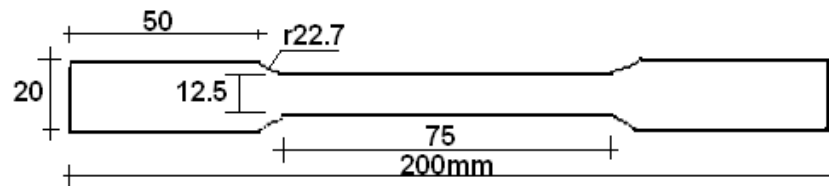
Geometry and dimensions of the test specimens. Dimensions in mm.
